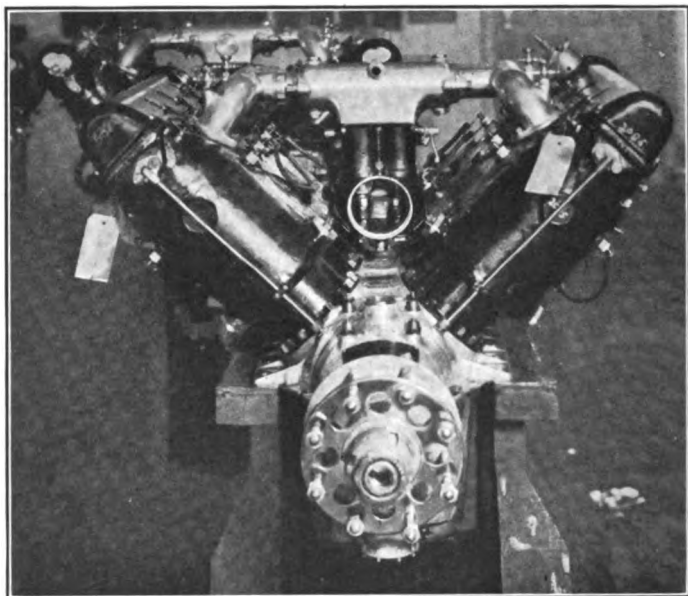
Carburetor inlet manifolds in position, models A, I and E.
